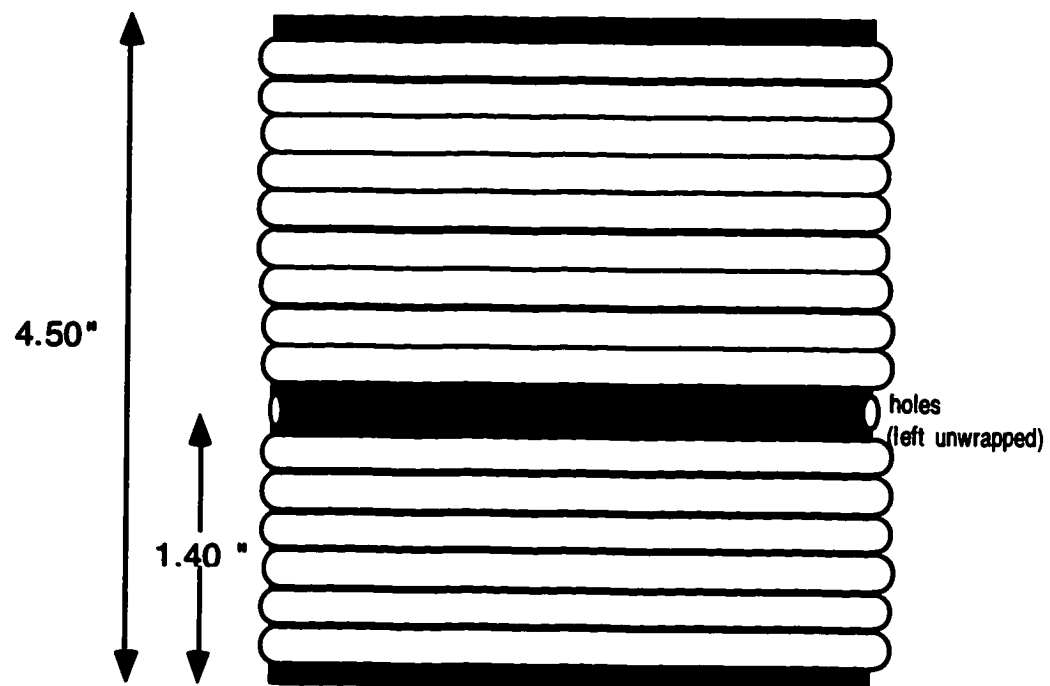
The stainless steel tube with the outside diameter (OD) 5" wrapped with the stainless steel cooling coil (OD 0.25"). The coil was spot-welded to the tube. The diameter of each hole is 0.25"
